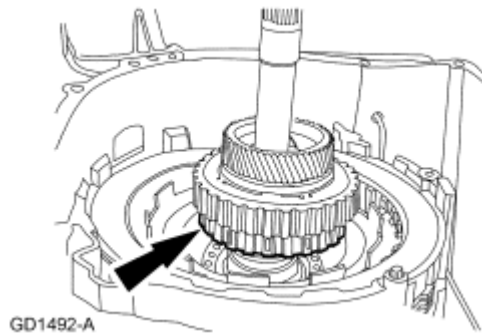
Forward One-Way Clutch & Low/Intermediate Sun Gear
